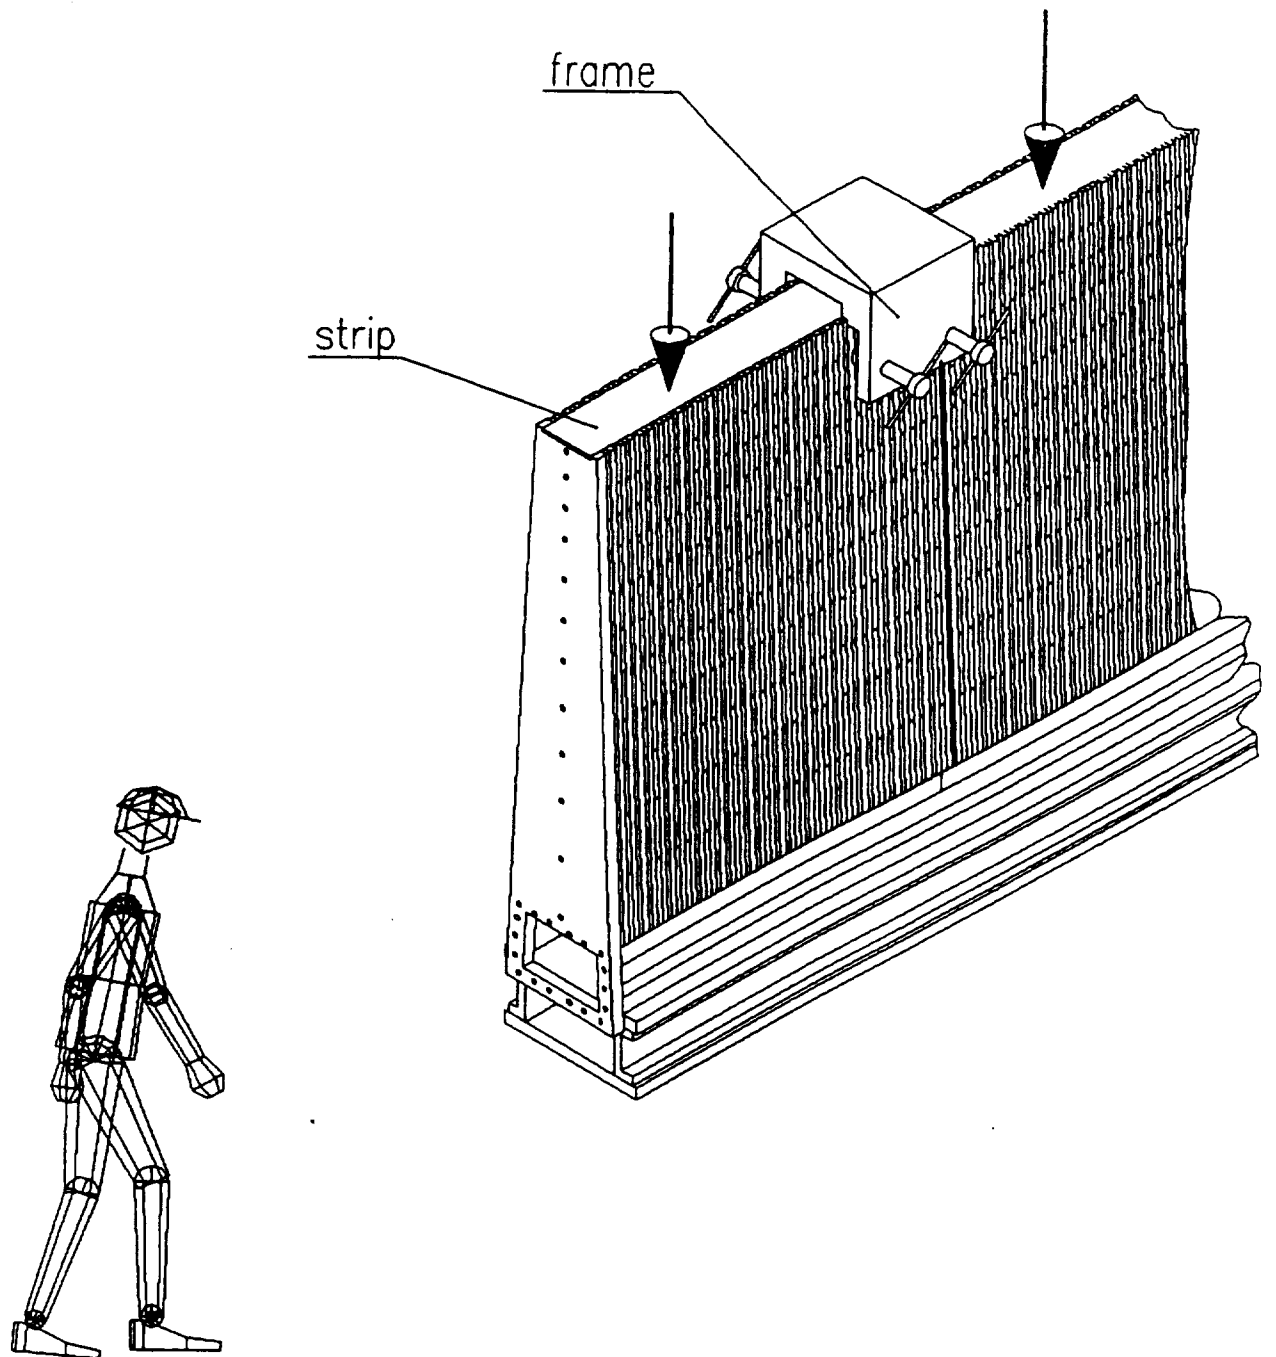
Assembly of frame on supermodule in the inner radius zone, aligning of narrow module sides, press of strip ($S=10\text{mm}$, $L=5900\text{mm}$) into engagement with recess, lining test of all supermodule sides.
